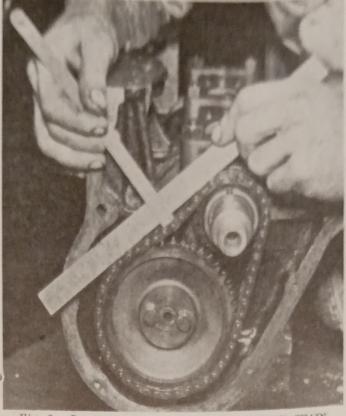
CHECKING THE WEAR ON THE TIMING CHAIN
